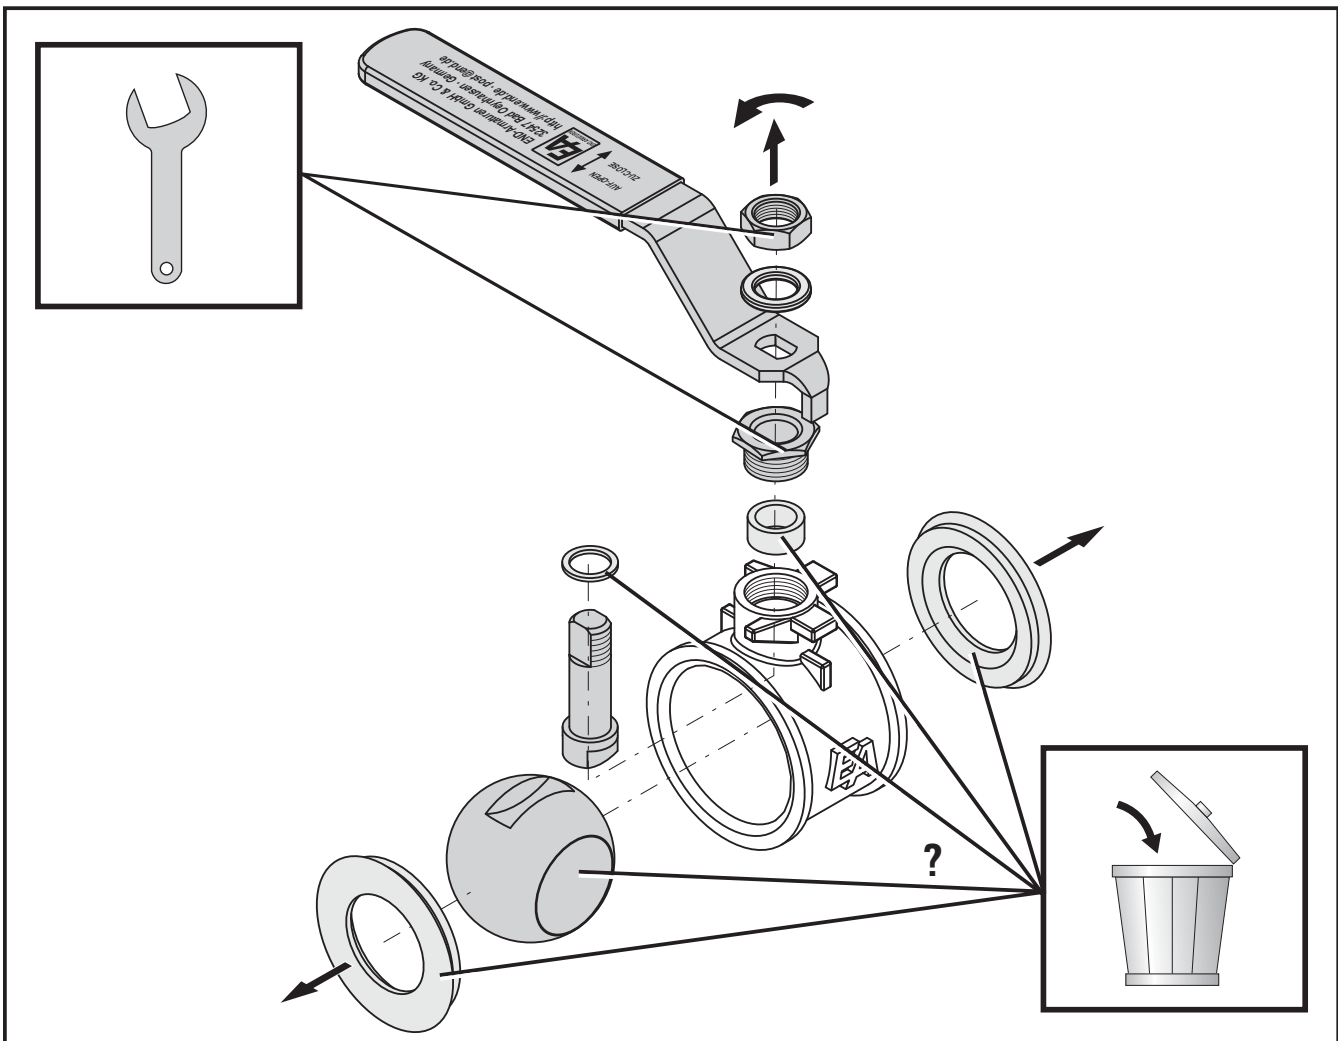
ball valves, replacement of the sealing kit: removal of the inner parts (Fig.: Art. ZE311064)
